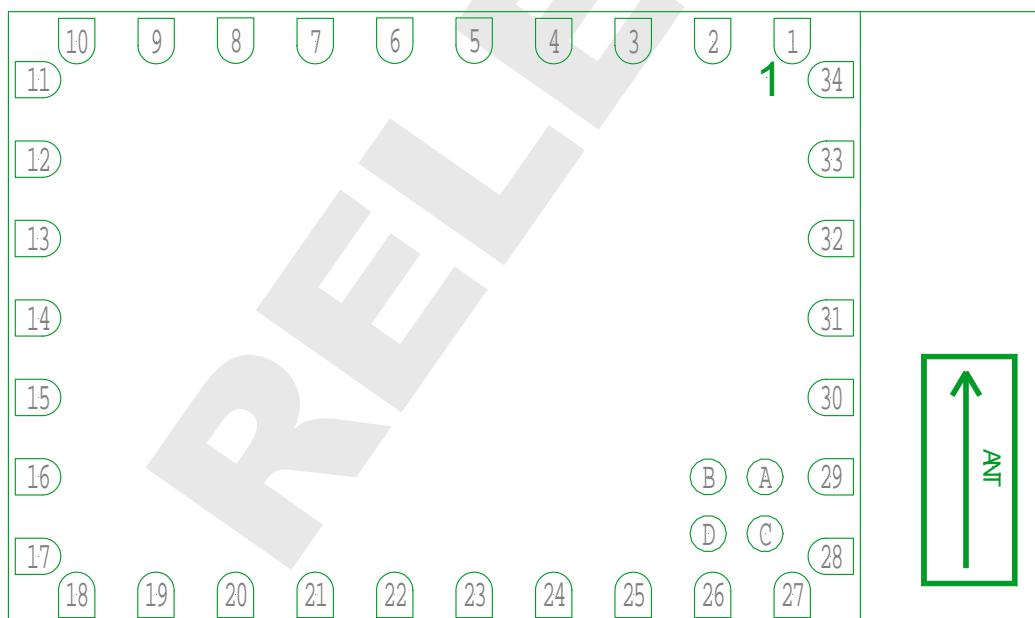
PAN1455/1555 Pin Numbering Bottom View
